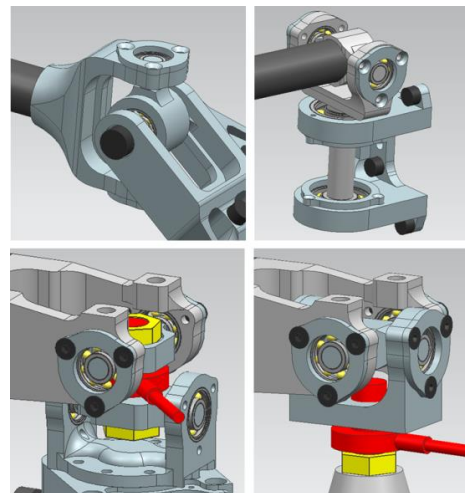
Universal joint designs. From upper left to lower right: lower ankle, lower hip, knee, universal upper
